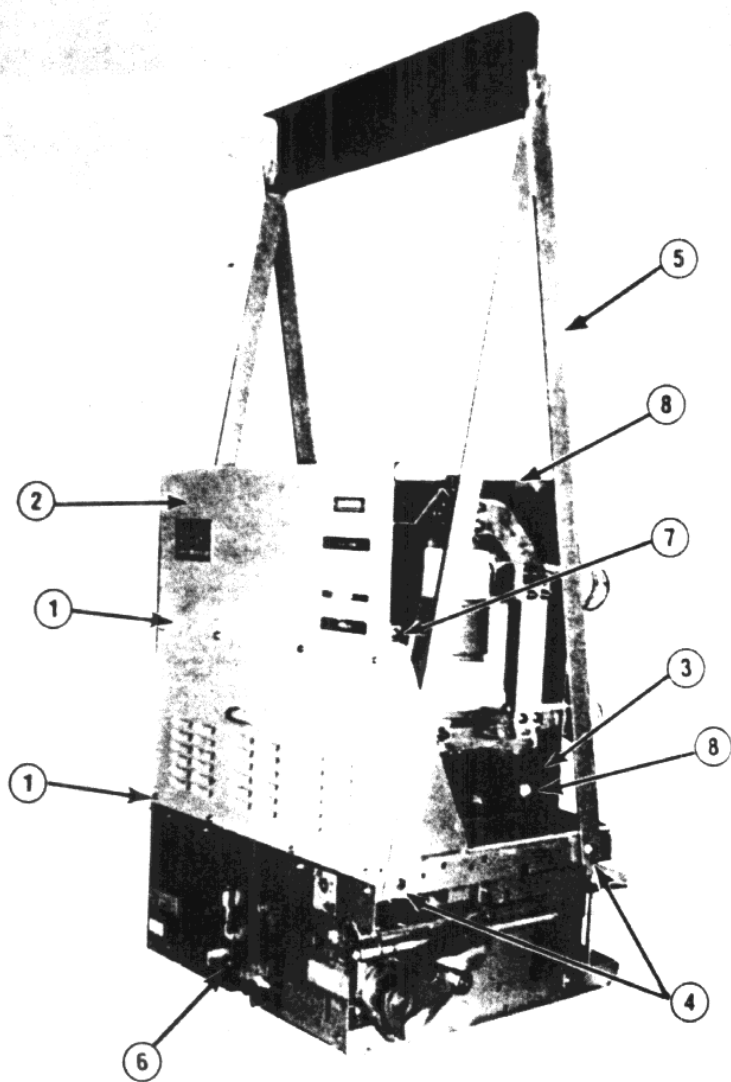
Circuit Breaker Assembly with Lifting Yoke Installed
